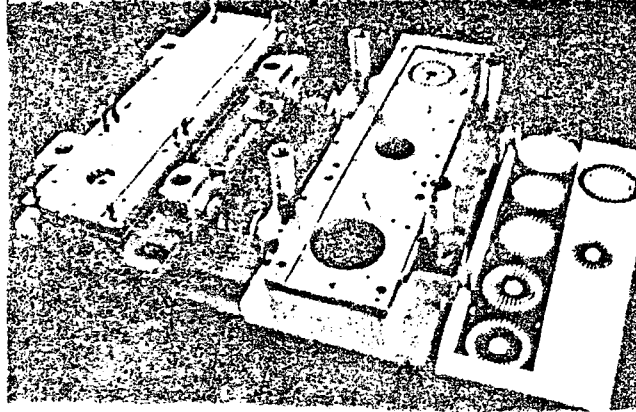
Sheet utilization in blanking various pieces for stator and rotor
